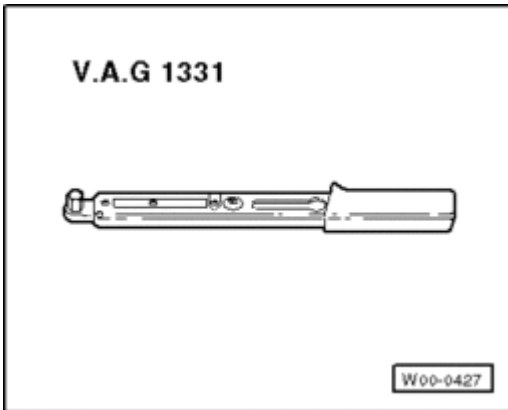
Identifying Special Tools - Valve Stem Seals, Removing And Installing
